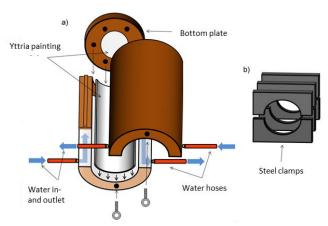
Cylindrical water cooled copper mould for electrode casting in VIM
